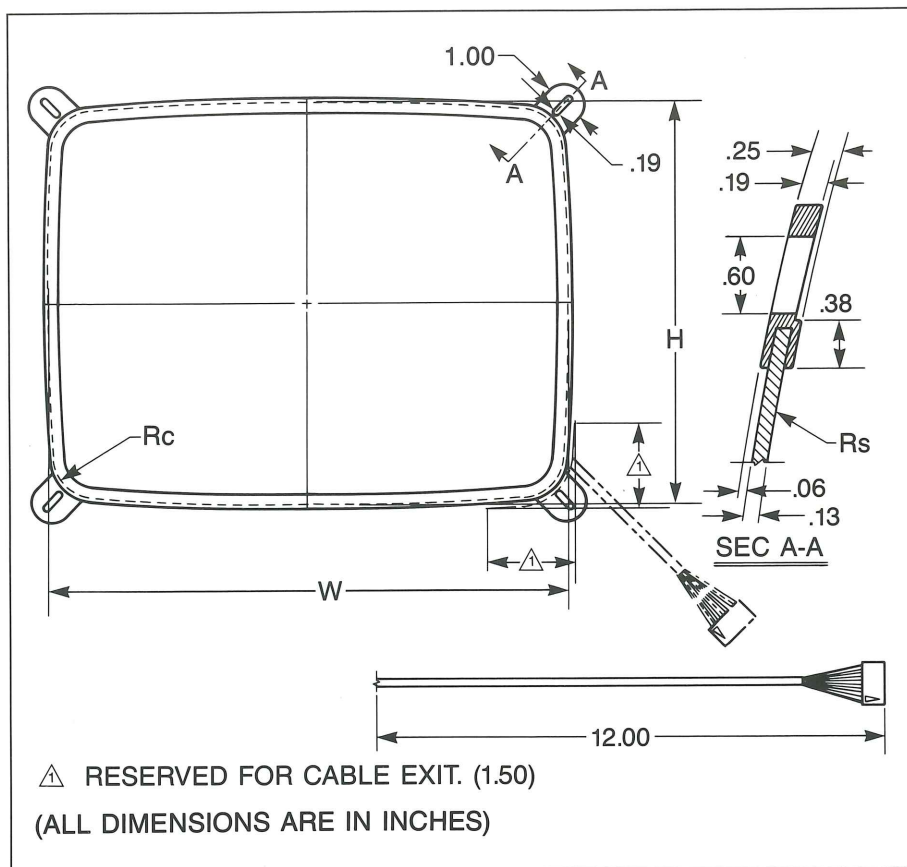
Drawing of Touch Panel. See Table 1 for specific dimensions.
